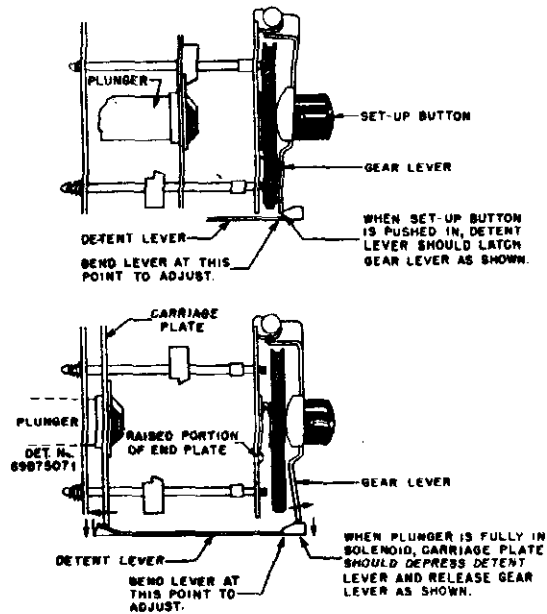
GEAR LEVER LATCH ADJUSTMENT
